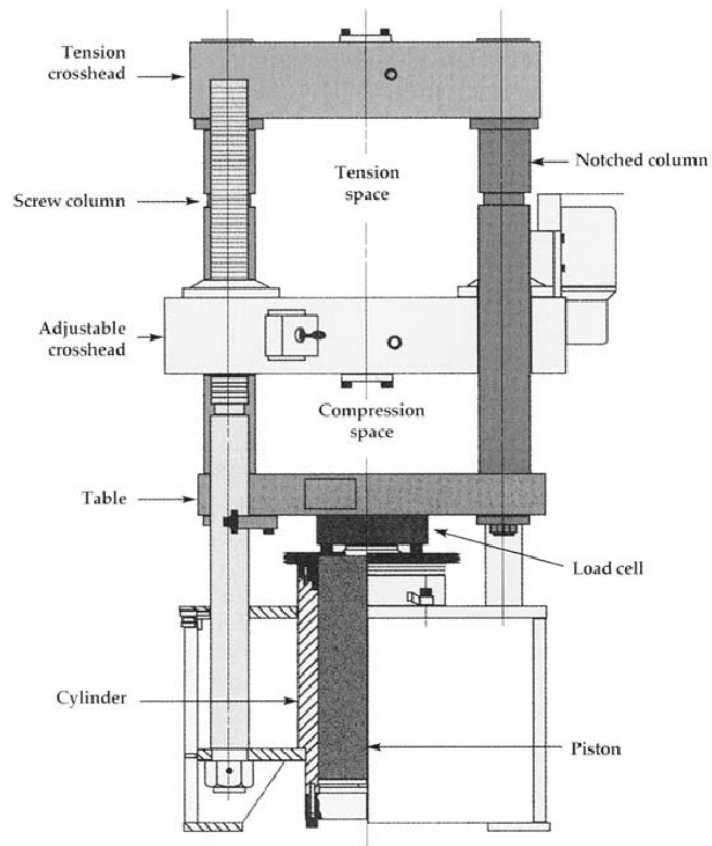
Hydraulic Universal Testing Machine and Its Components
